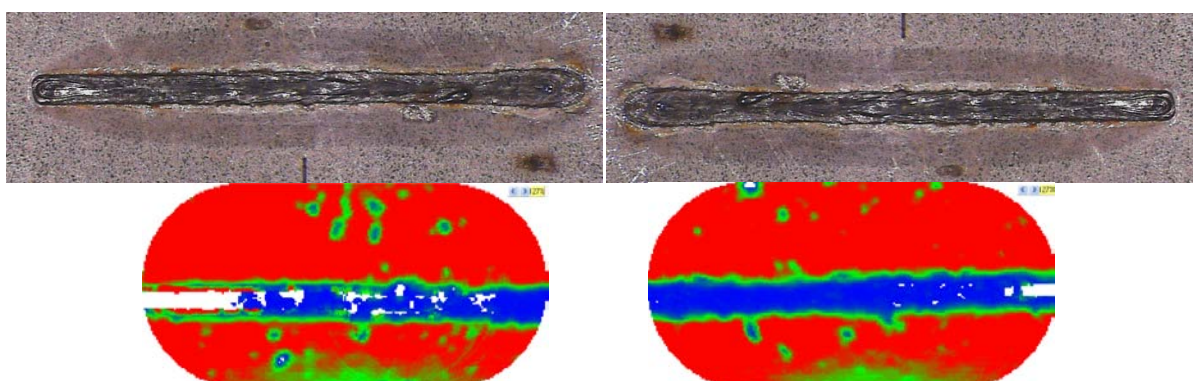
Weld top bead (0mm gap, sample B) and Amstech result from top bead (L) and bottom bead (R)
